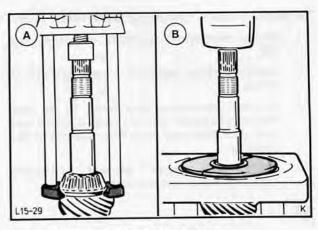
Remove large taper roller bearing A – Tool 15–054
